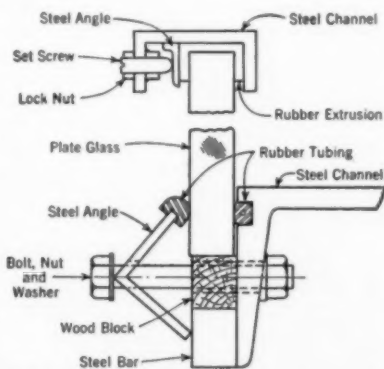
MOUNTING of plate-glass walls of flume, here seen in cross section, provides careful cushioning to avoid breakage under pressure of water and structural stresses. Glass is protected against contact with steel at all points. Rubber cushion covers top edge; continuous rubber tubing runs in milled slot of steel channel at right; supporting steel angle at left is edged with rubber tubing; and wood block supports weight of glass at lower edge.
